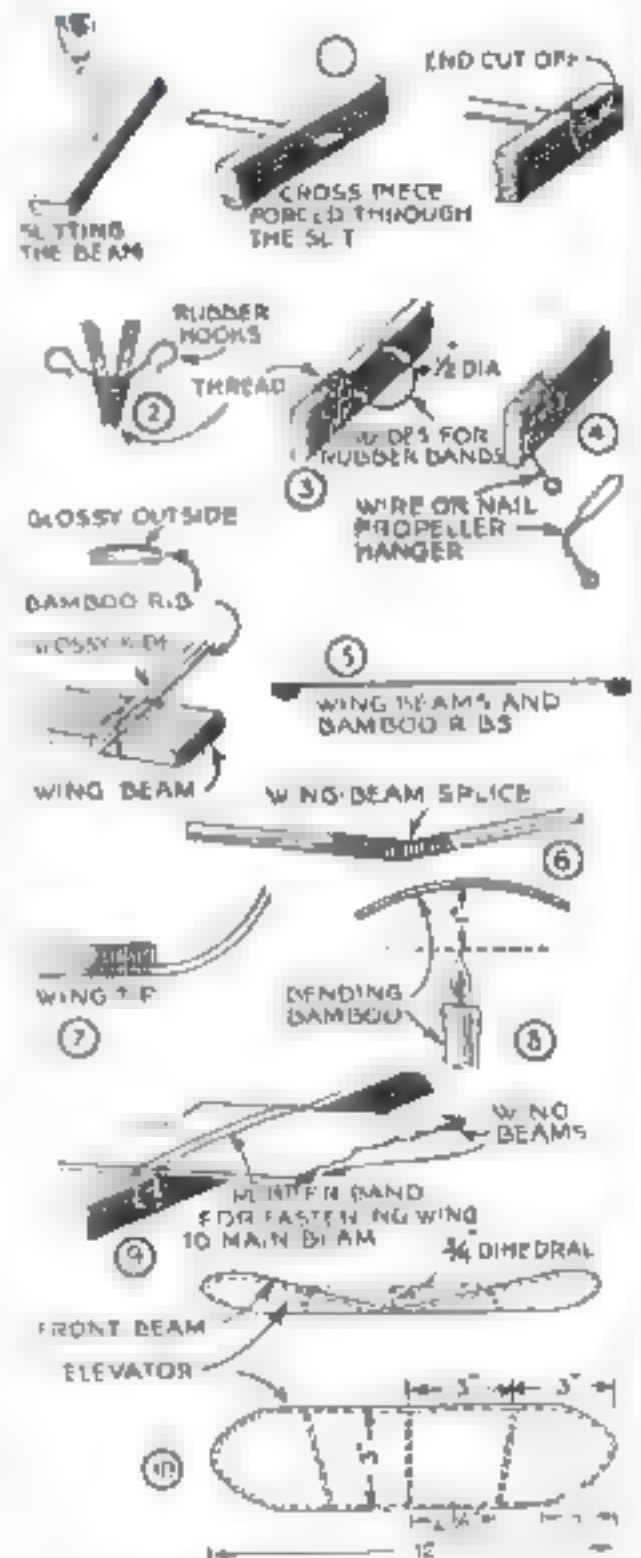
Connecting cross pieces to beams, making wire fittings, and other details.
